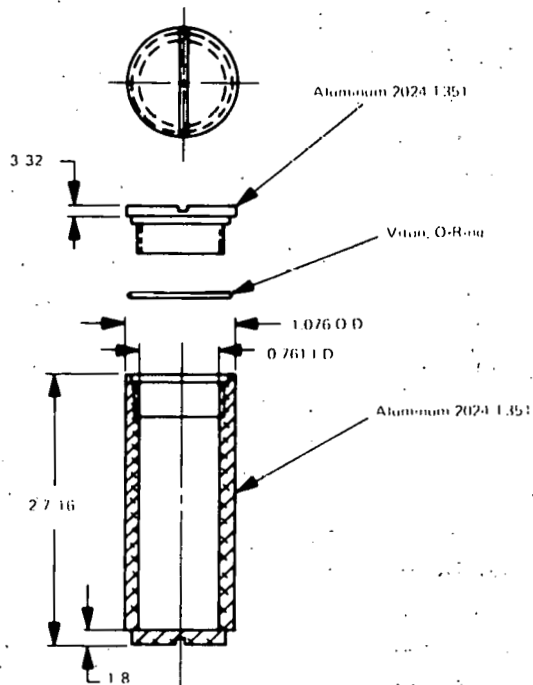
Plutonium outer capsule (dimensions in in.).
